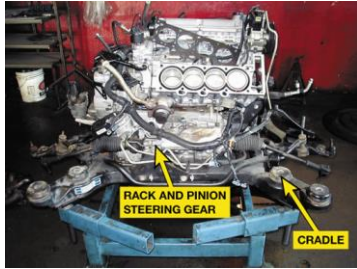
When removing just the engine from a front-wheel-drive vehicle, the transaxle must be supported. Shown here is a typical fixture that can be used to hold the engine if the transaxle is removed or to hold the transaxle if the engine is removed.
